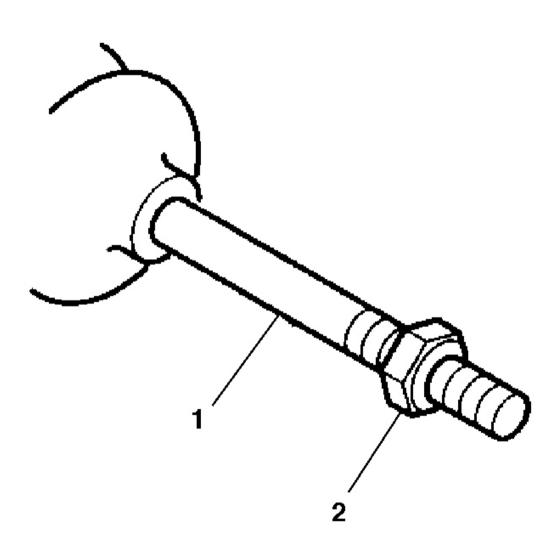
Jam Nut & Inner Tie Rod Assembly Courtesy of GENERAL MOTORS CORP.
